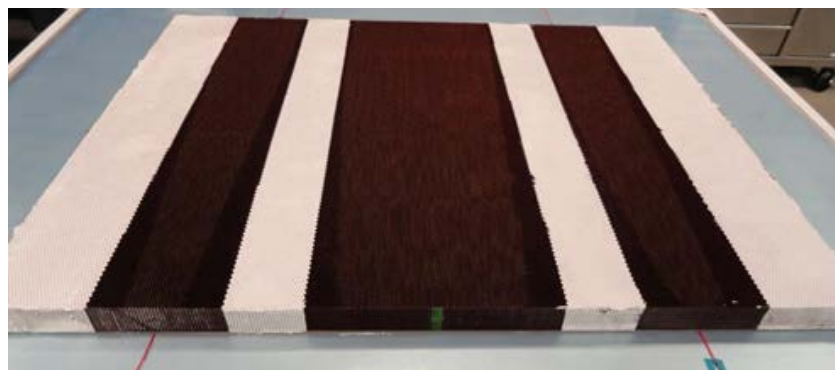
Uncured assembly 1 (facesheet 1, film adhesive and filled core)
